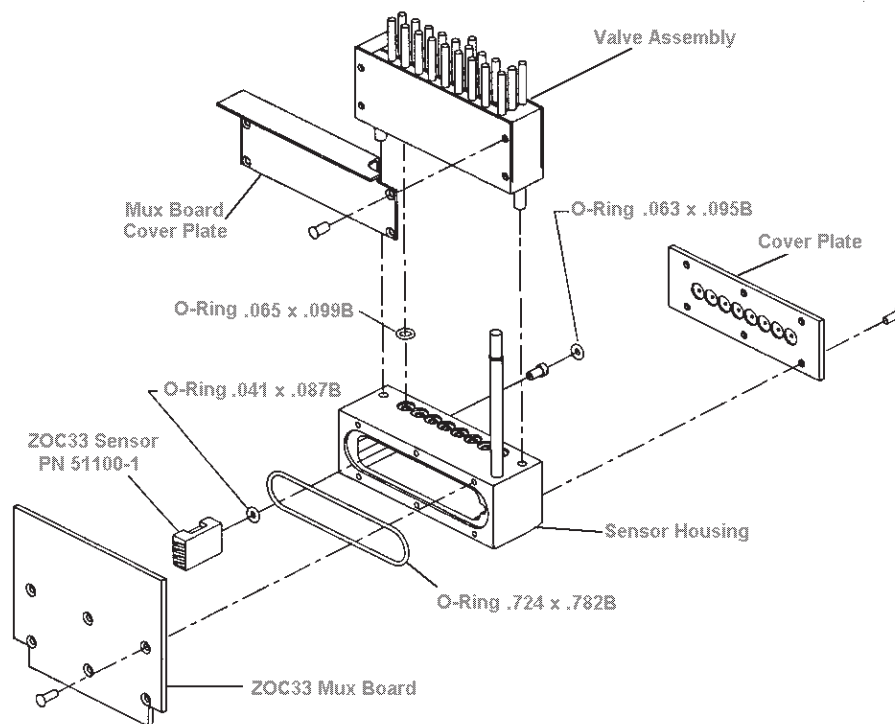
ZOC33 SENSOR PACK EXPLODED VIEW
